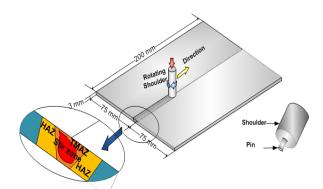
6061-T6 AA plates dimensions and Schematic of friction stir welding (FSW)
